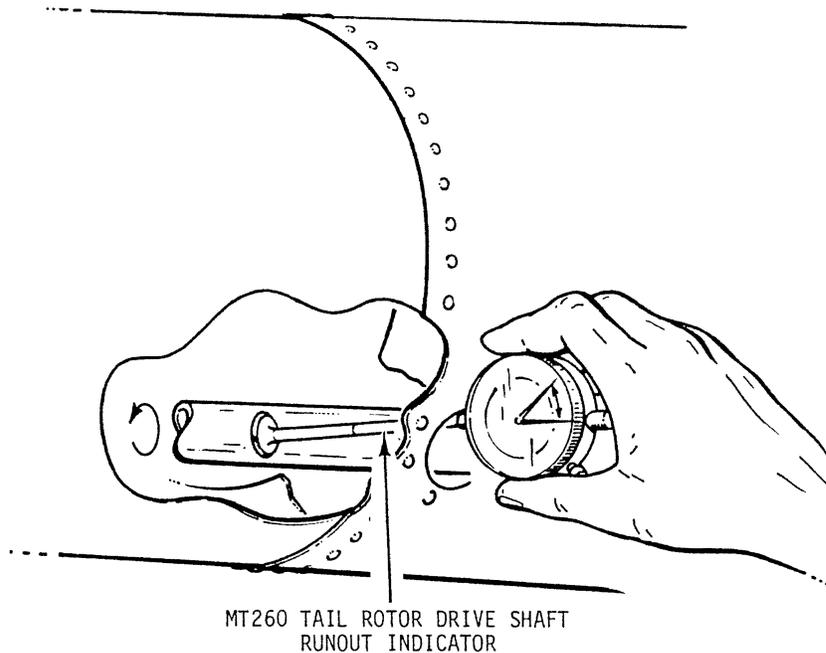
TAIL ROTOR DRIVE SHAFT RUNOUT CHECK
